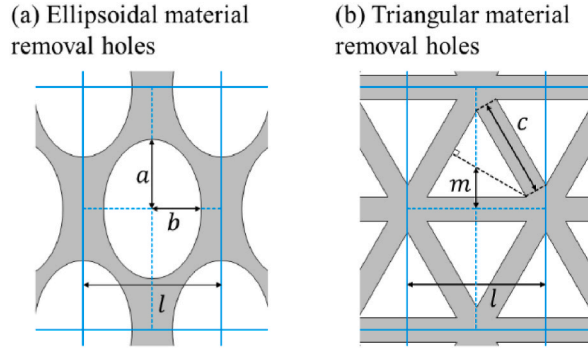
Material removal holes used in this study: the elliptical-shaped holes (a) and the triangular-shaped holes (b).
